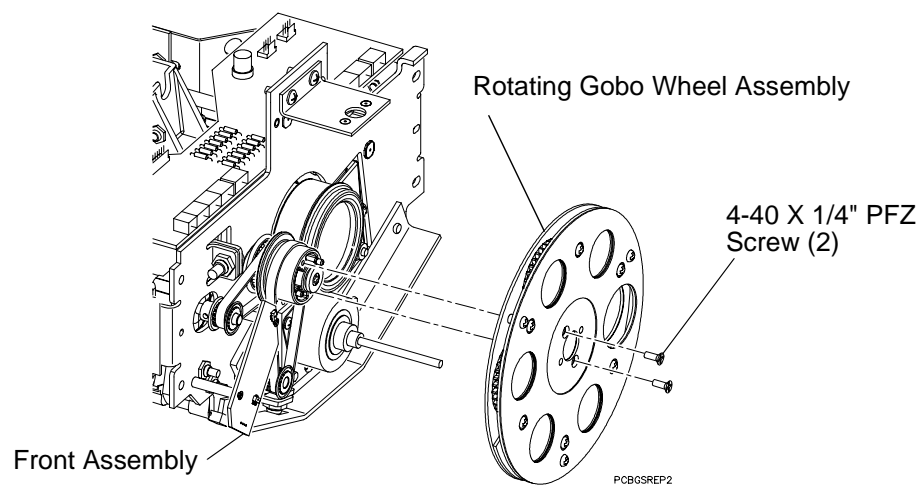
VL6B/VL6C Rotating Gobo Wheel Assembly Replacement
